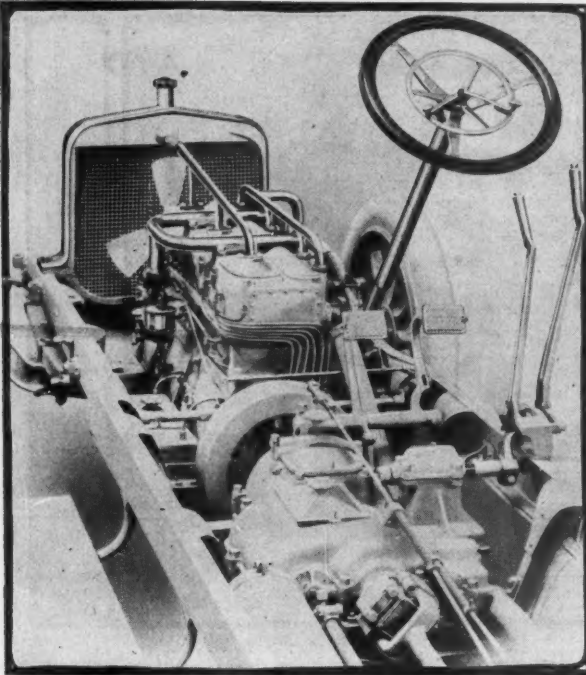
CHASSIS ASSEMBLY ON 1912 WINTON SIX
